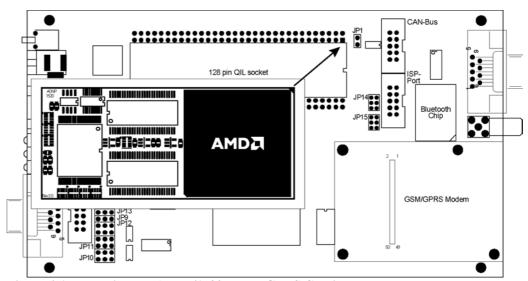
Mounting the ADNP/1520 on the GPRS Carrier Board
